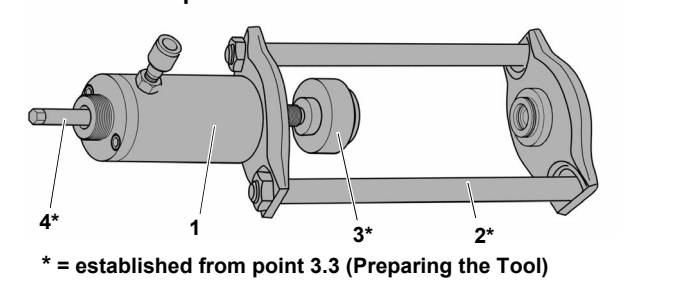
Press Frame, Hydraulic Cylinder, Pressure Spindle and Adaptor.
